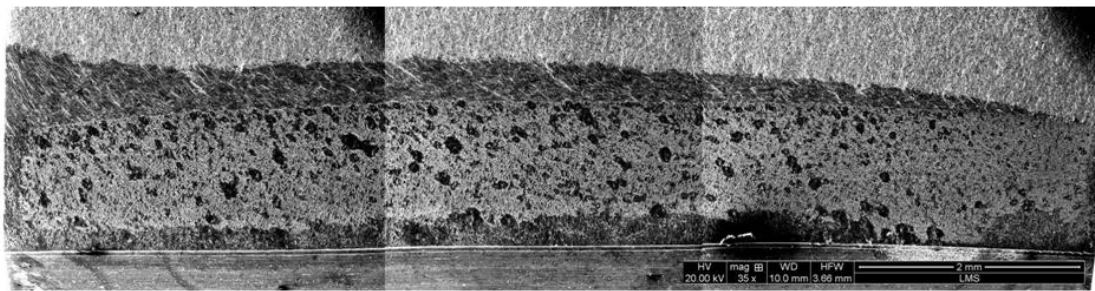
Fracture surfaces of specimen n°9 ( $\alpha=45^\circ$ )
